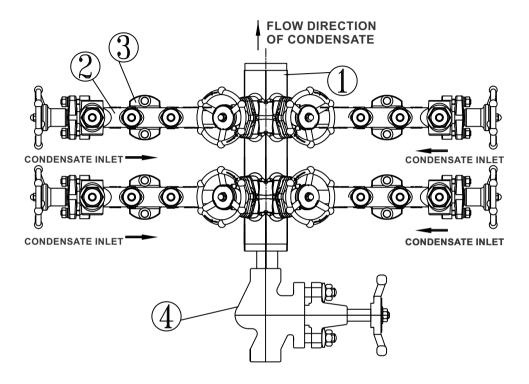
Typical installation of FMPC53 with Forbes Marshall universal tracer line trap [FMTLT63-U] installed on condensate manifold.
